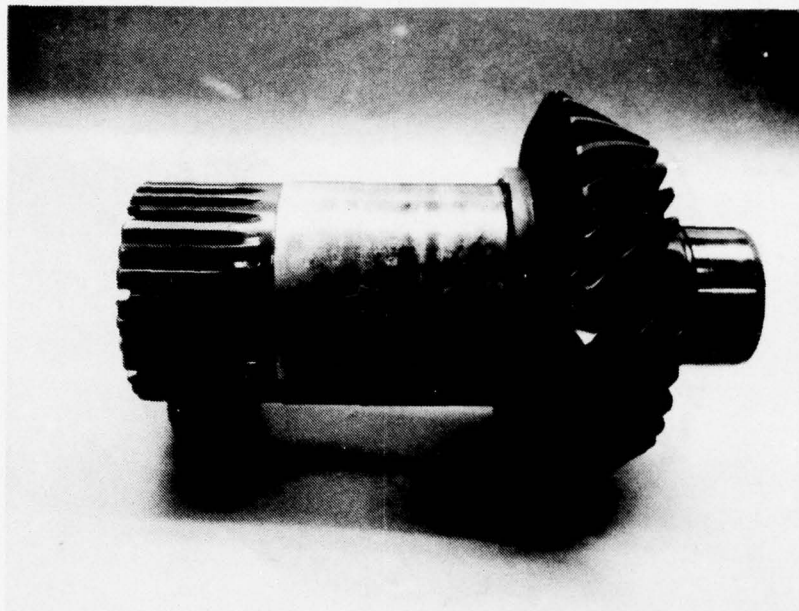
Main input pinion after 21-minute loss-of-lube retest of transmission number 1.
